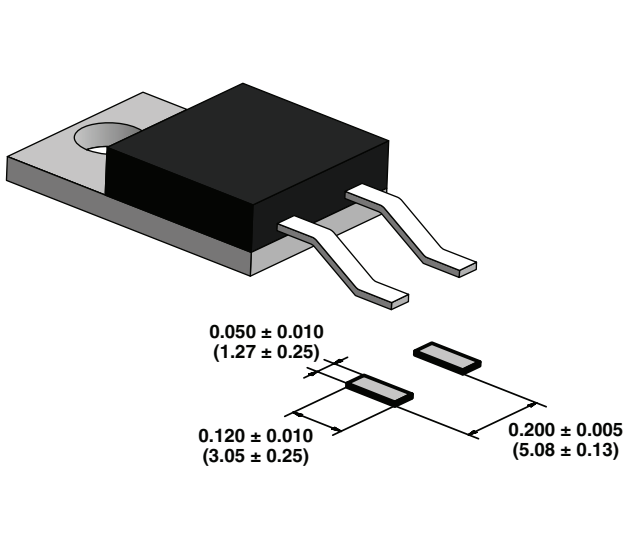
VPR220S DIMENSIONS in inches (millimeters)
